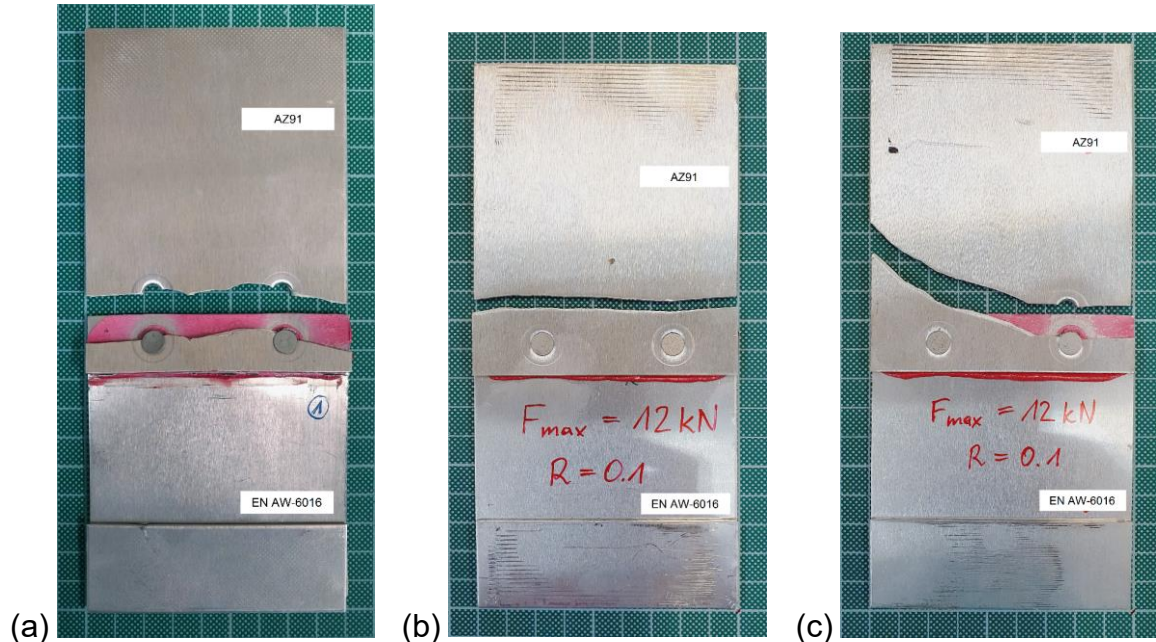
Typical fracture of AZ91 sheets after (a) monotonic-static and cyclic-dynamic testing of samples with (b) shear-cut and (c) milled side edges
